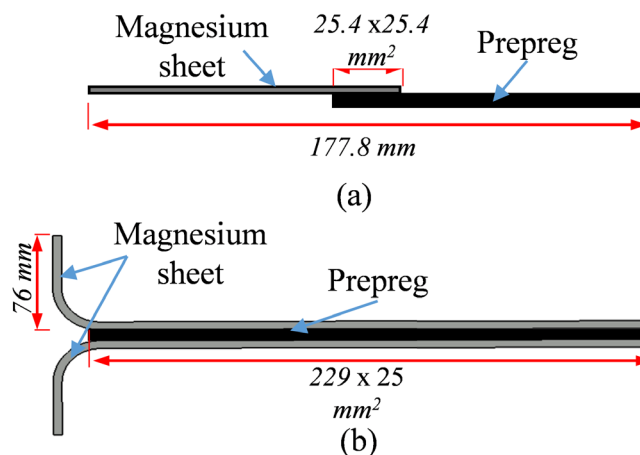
Geometry of the specimen for the single lap shear tests (a) and T-peel tests (b).
